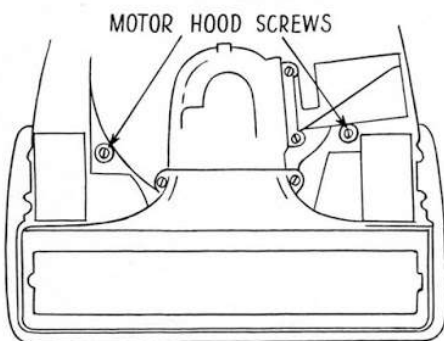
Bottom view of Model 60, showing the motor hood screws
